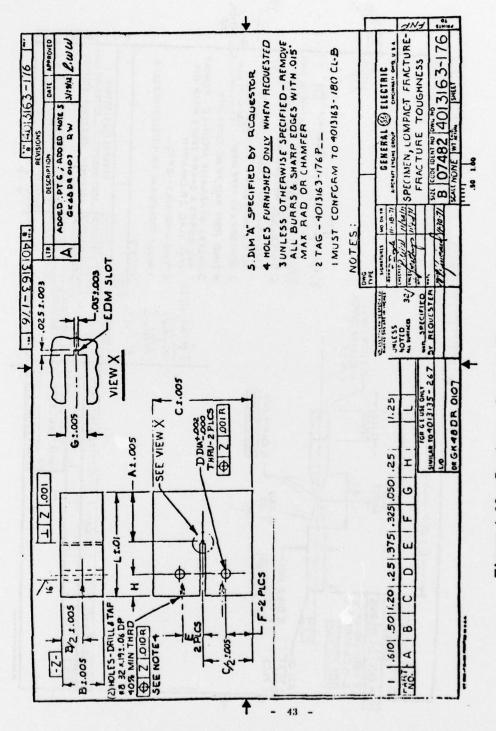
Specimen, Compact Fracture - Fracture Toughness
